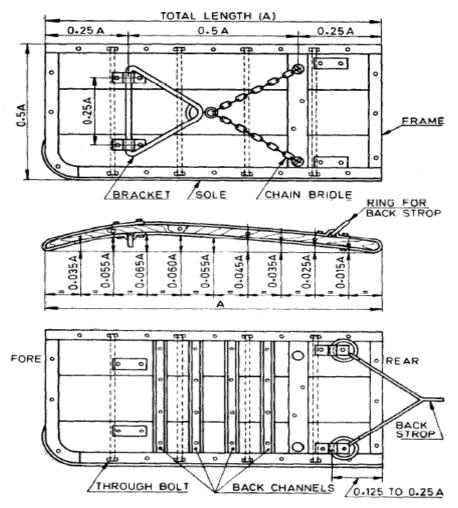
CONSTRUCTIONAL DETAIL OF OTTER BOARDS
